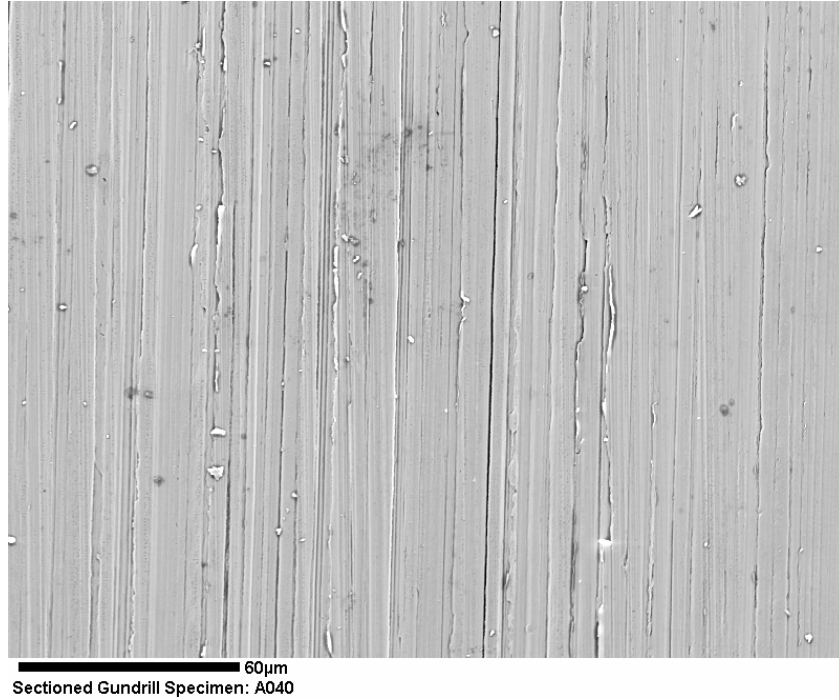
500X SEM of A040. 304L; The seventh hole drilled at 0.5 in/min, and 11,000 rpm in a 304L forging with 50-50oil.
